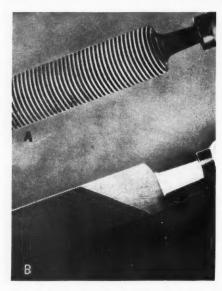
Illustration Showing Files Which are Designed for Filing Aluminum
